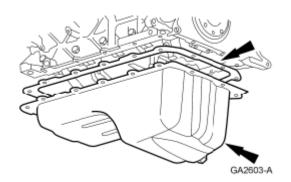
Locating Oil Pan Gasket And Oil Pan Courtesy of FORD MOTOR CO.
